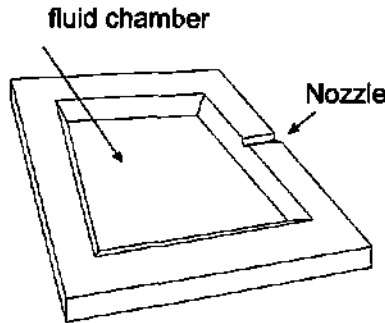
The basic side-shooter design. Nozzles are formed by etching trenches in one or two sides of the device. The two sides are later assembled to form the nozzles and the fluid chamber.
